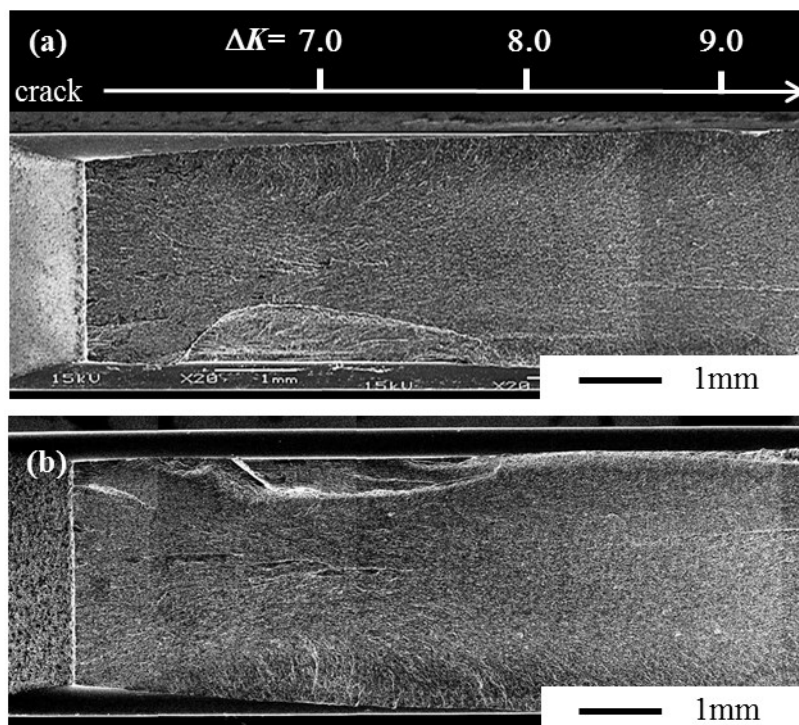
Fracture surface of Asweld after FCP test.
